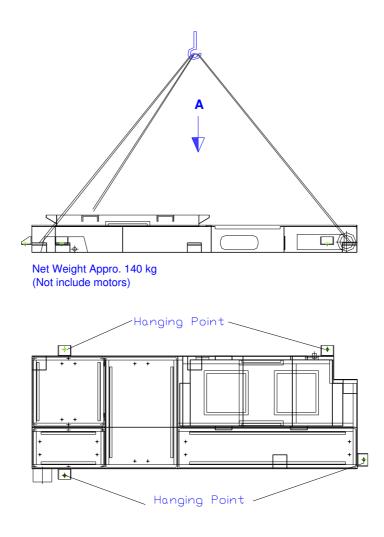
HANGING OF SIDE COOLAN TANK
